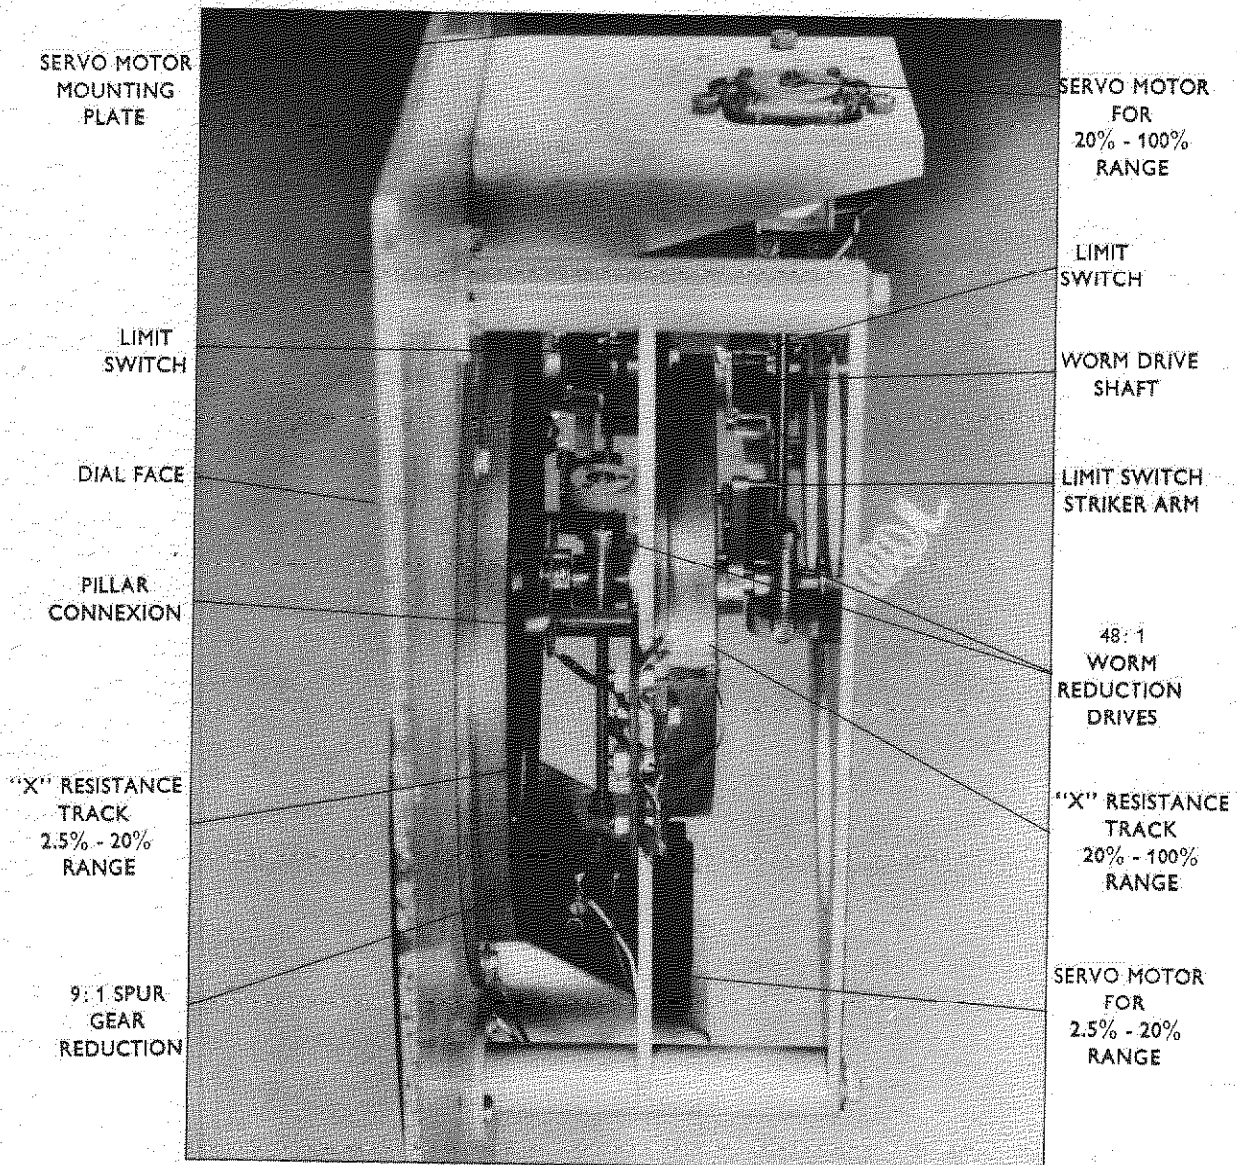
DIAL PLATE, SERVO MOTORS AND DRIVES ASSEMBLY
